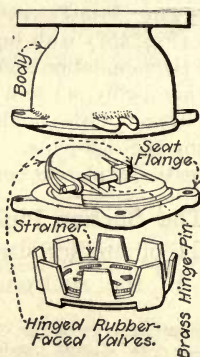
A Foot-Valve Disassembled. (Strainer shown broken from seat-flange.)
